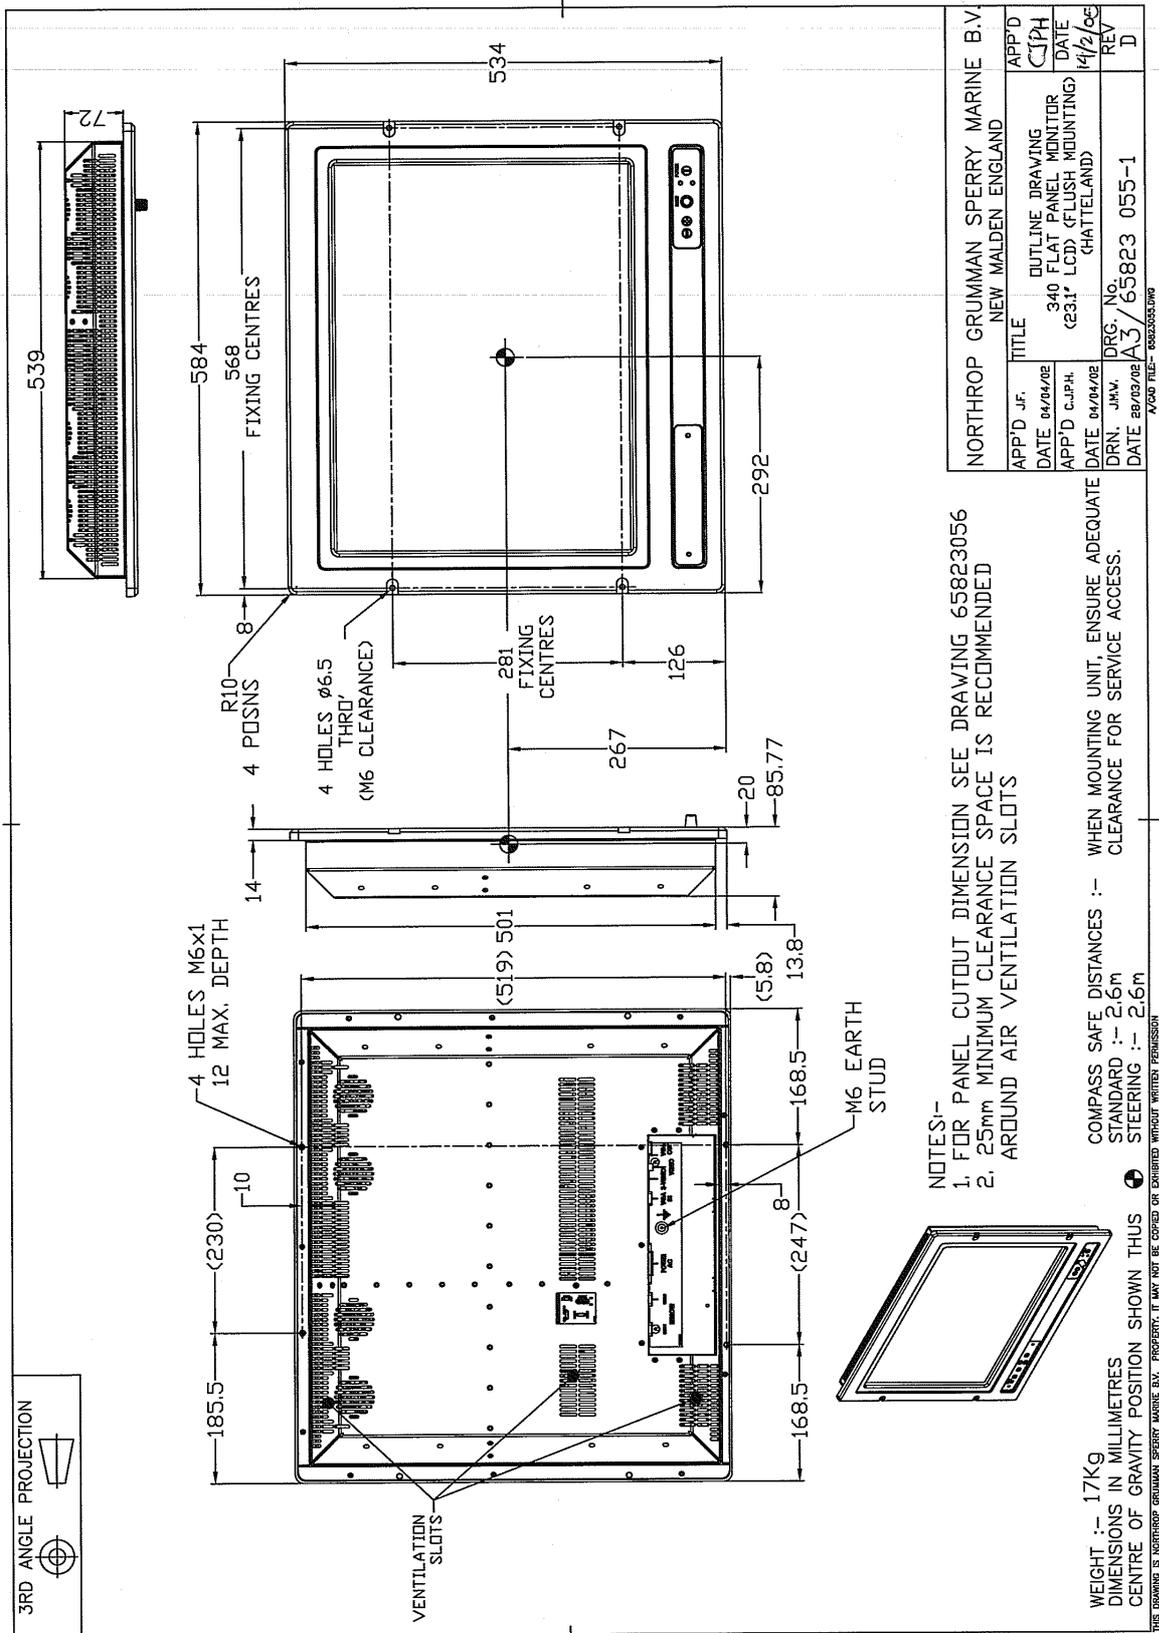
340 Monitor Module (FPD) Outline Drawing
